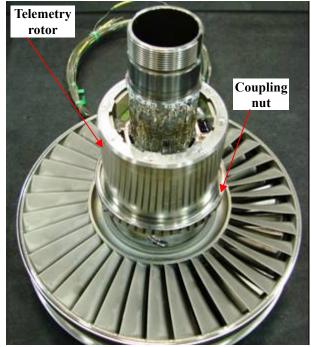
Power turbine shafting assembled with turbine blisks and coupling nut.
